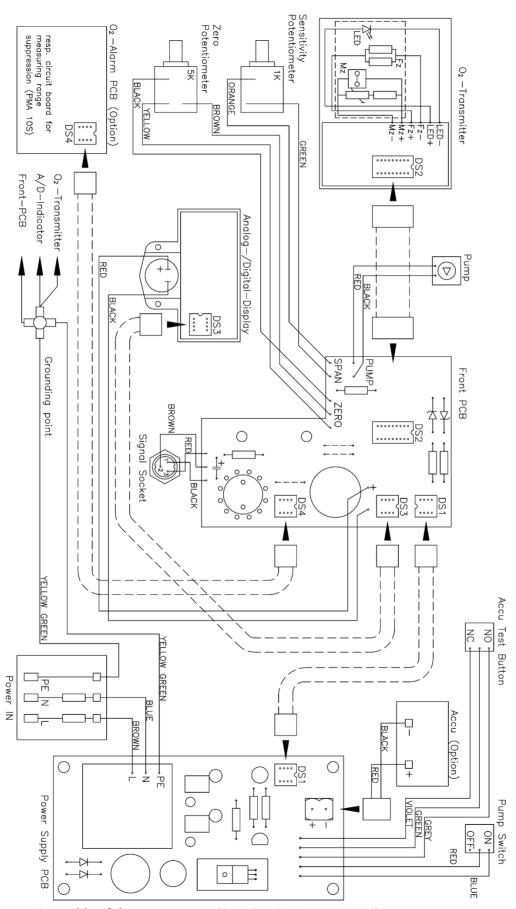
Assembly of the components (Drawing-No.: 2355-5.01.0)
